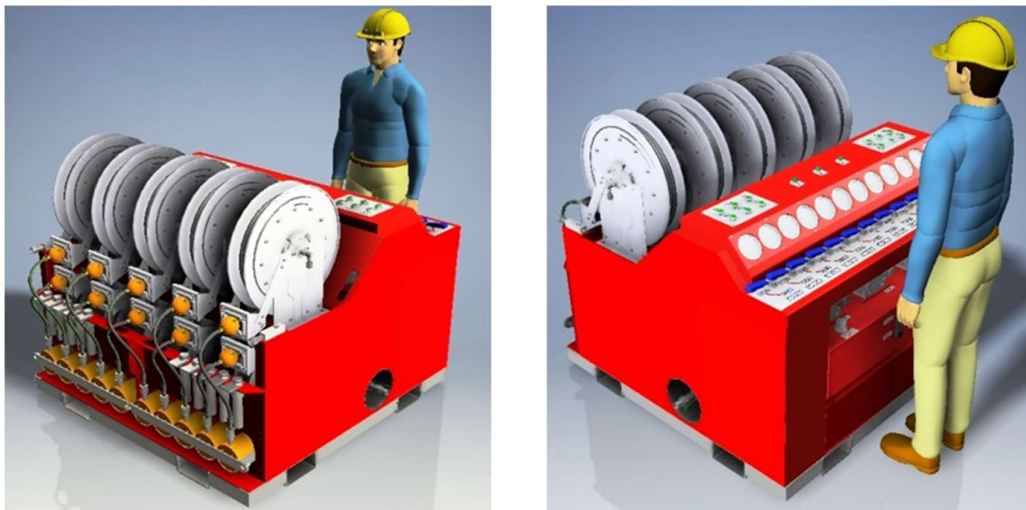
New hydraulic wedge puller. Left: back view, Right: front view.
